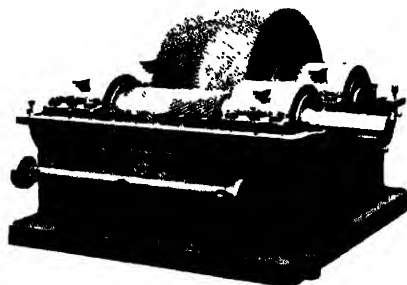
HELICAL GEARING. Pinion and wheel with double helical gears, used for steam turbine reduction gears.
